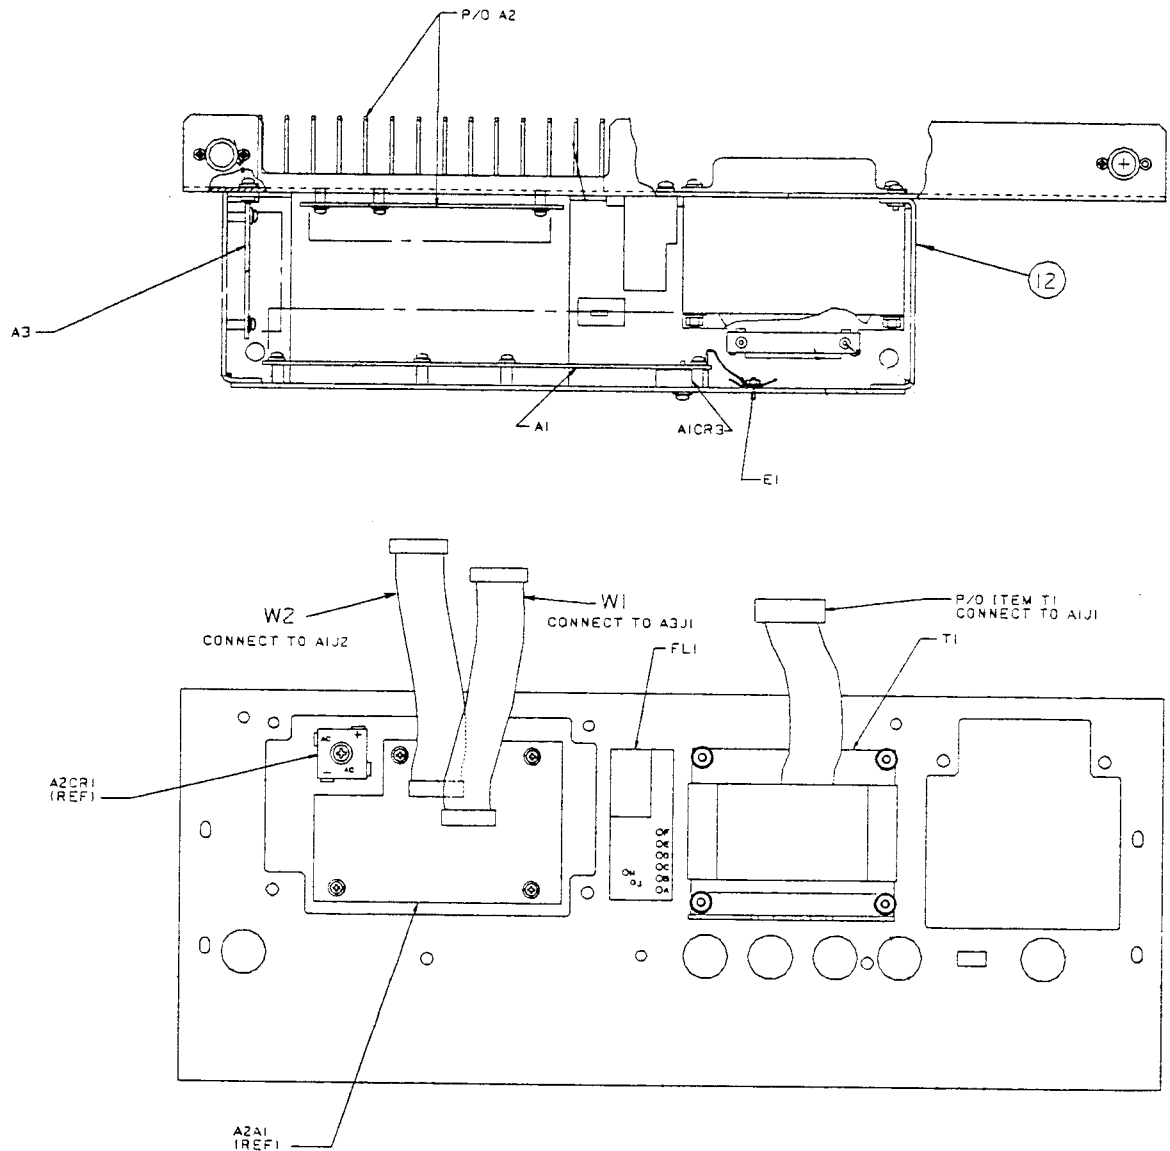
Power Supply Assembly A15 Component Location Diagram (10121-3000)
